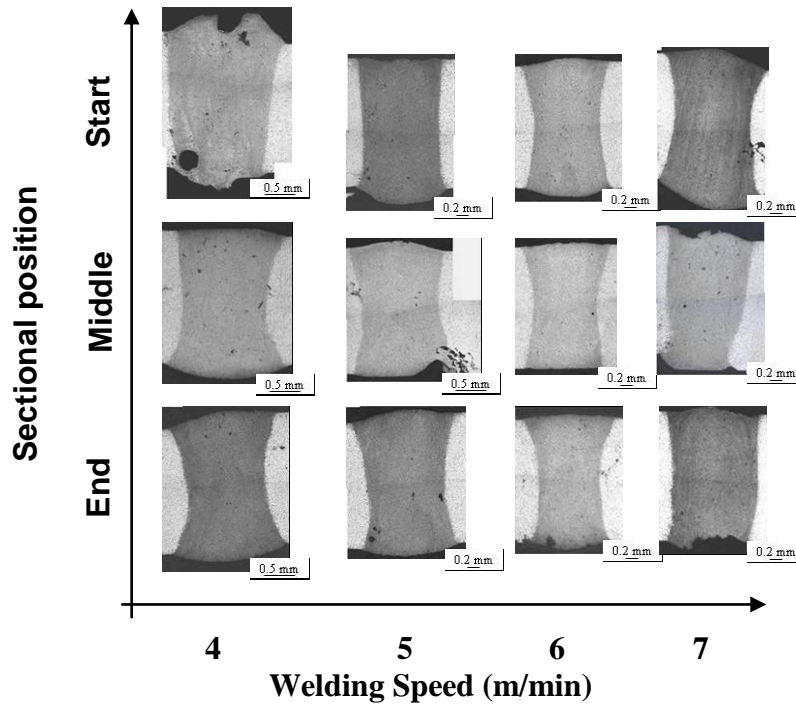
Effect of Welding Speed on Weld Geometry.
